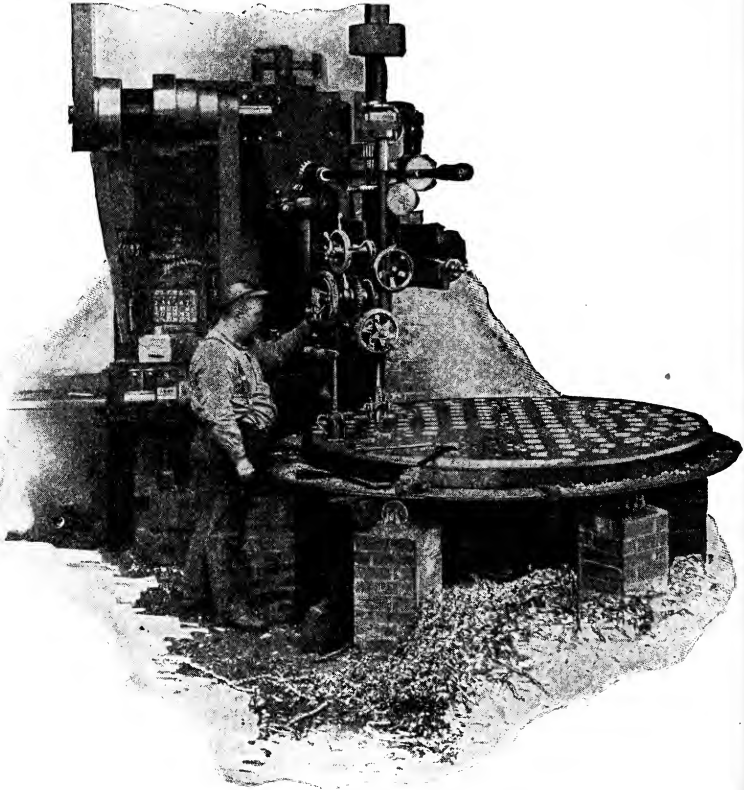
,251.—Drill at work cutting tube holes. A $1\frac{1}{16}$ -inch centering hole should be punched as a guide to the cutter and a solid disc should then be cut from the head for each tube, and after being cut the beading side should be slightly countersunk.
